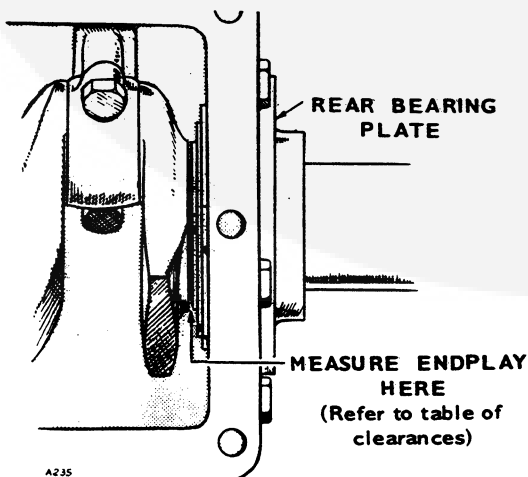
MEASURING CRANKSHAFT ENDPLAY
